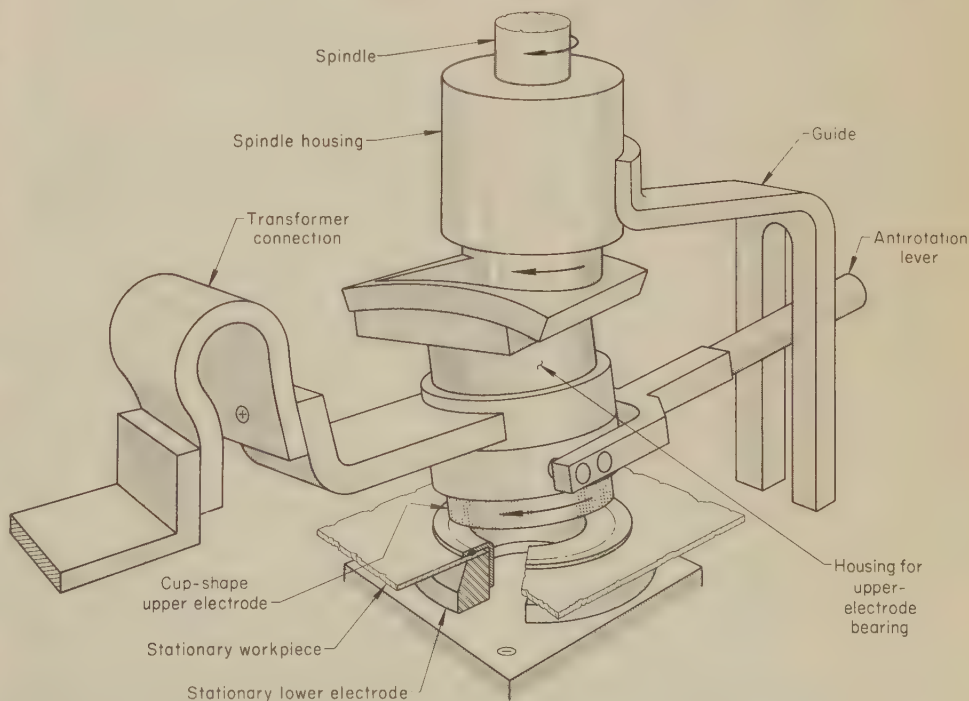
Use of a free-rotating cup-shape upper electrode mounted on a canted axis for making a flat circular seam weld
